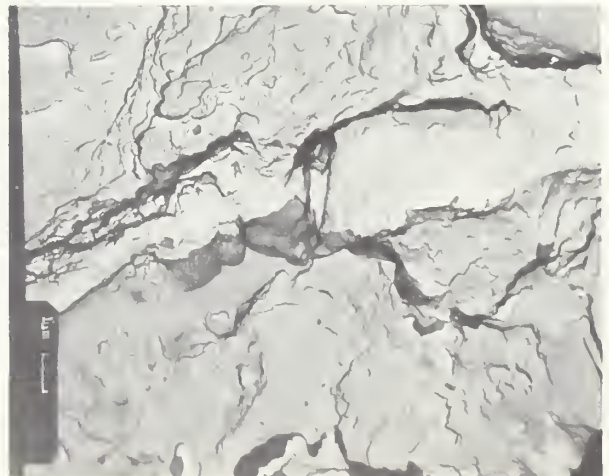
Fracture surface approximately 1.5 mm from fillet edge.
